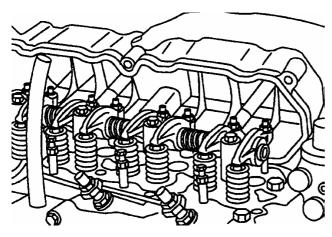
Disassembly of the head cover of the MITSUBISHI engine cylinder block
